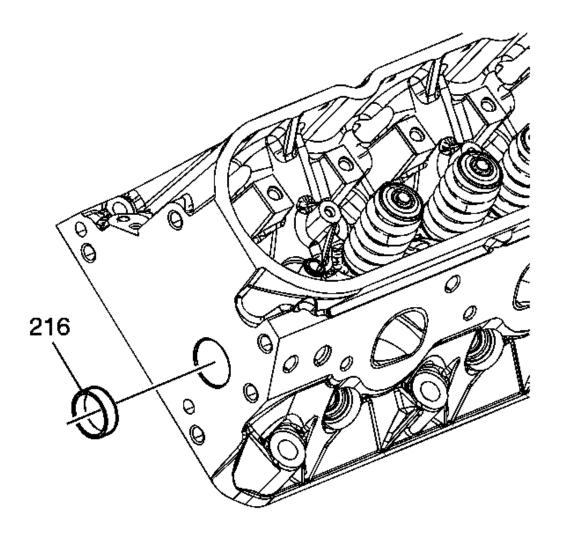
Locating Cylinder Head Core Hole Plug Courtesy of GENERAL MOTORS CORP.
